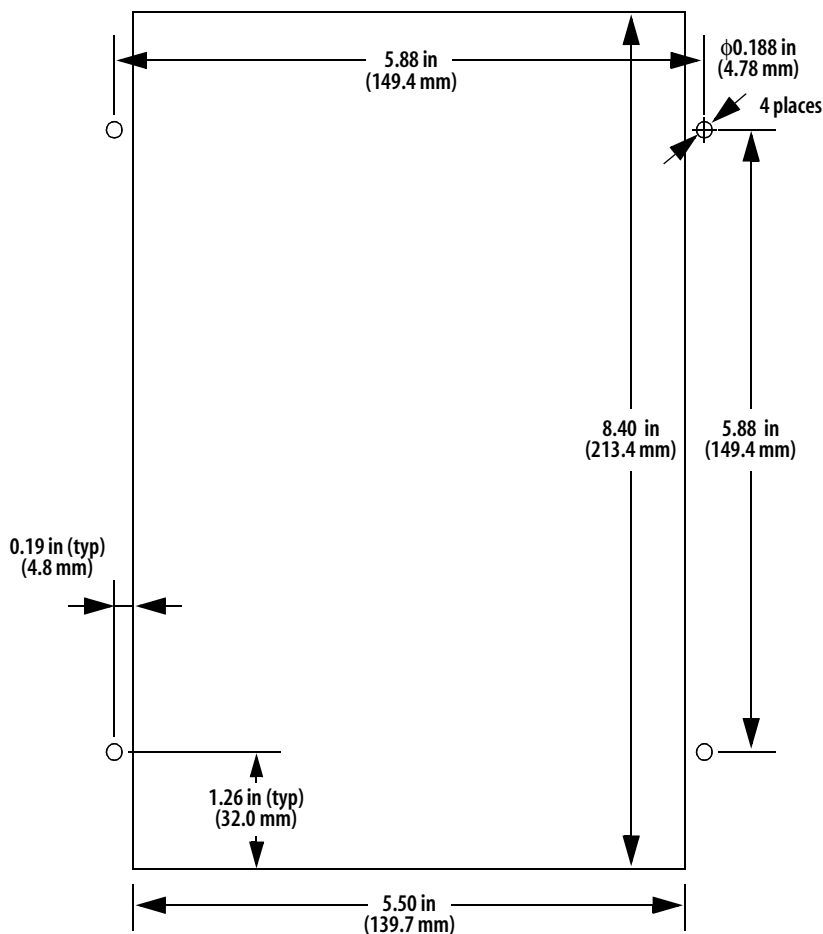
SEL-701 Relay Cut and Drill Dimensions.
